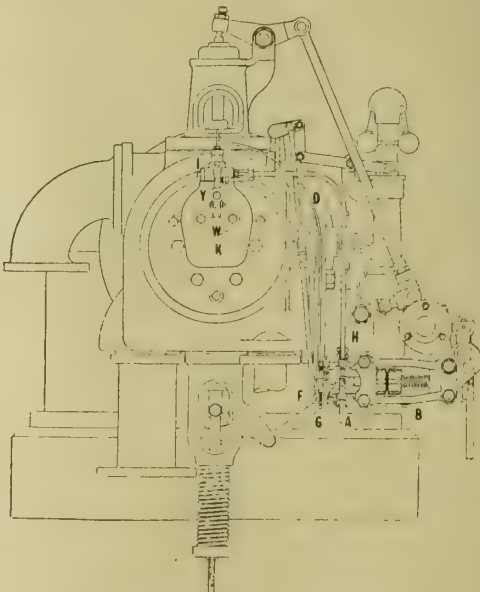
RUSTON-PROCTOR OIL ENGINE.
